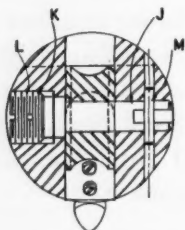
Drawing illustrating method of applying tension to the tool holder.
